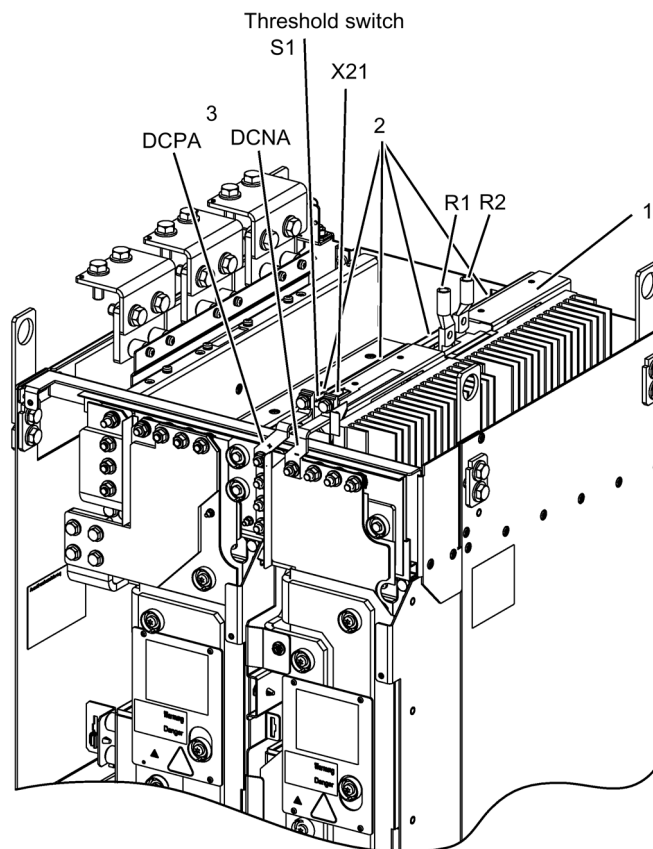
Installing the Braking Module in a Power Module frame size HX
